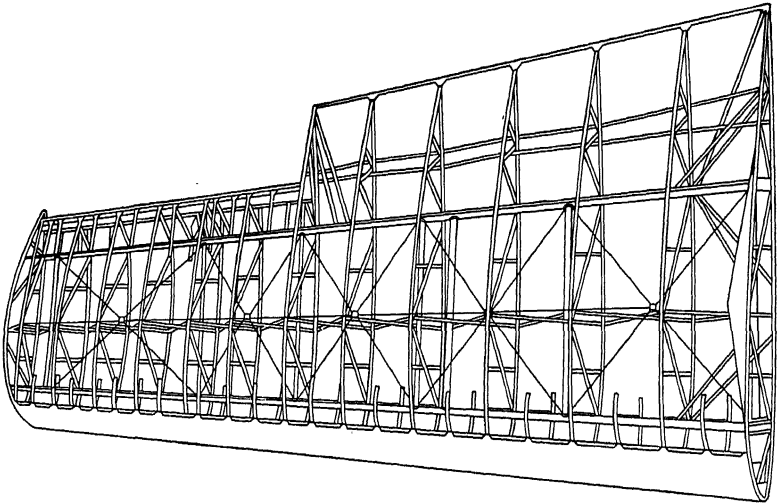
Two-spar wing with wire dragbracing, designed for fabric cover.
